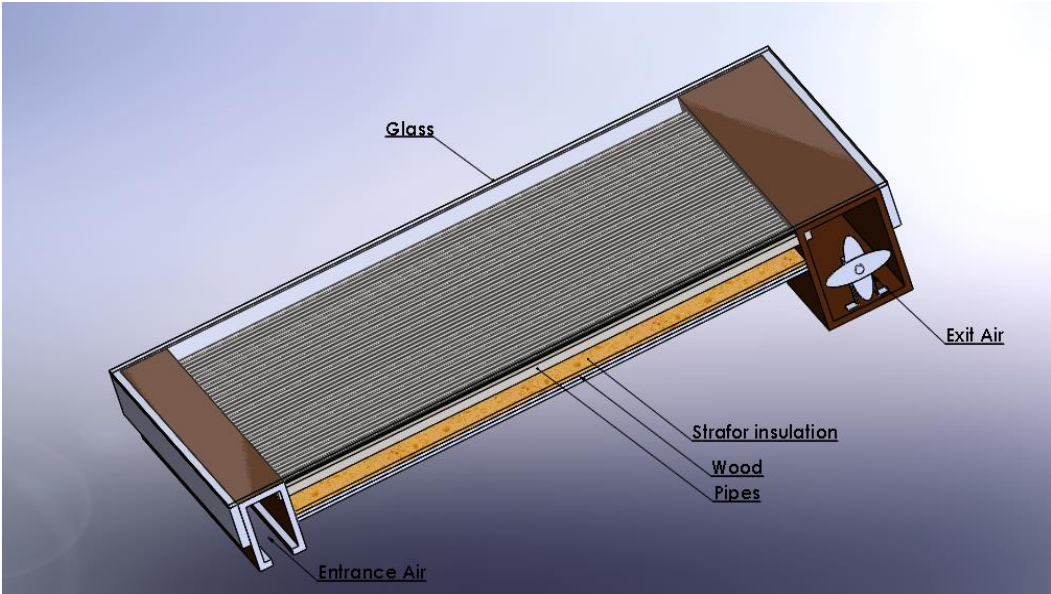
Sectional side view of the panels and the parts of the collectors.
